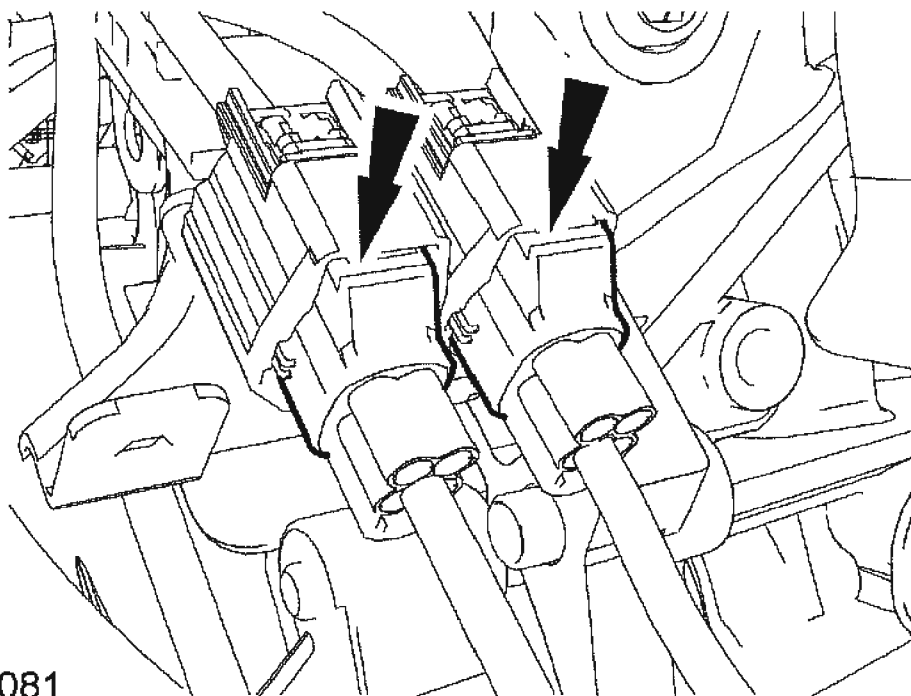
Connecting Exhaust Sensor Electrical Connectors
